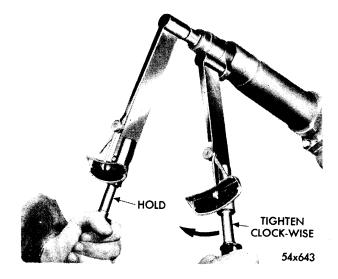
Adjusting Worm Housing Bearings (Outer)
